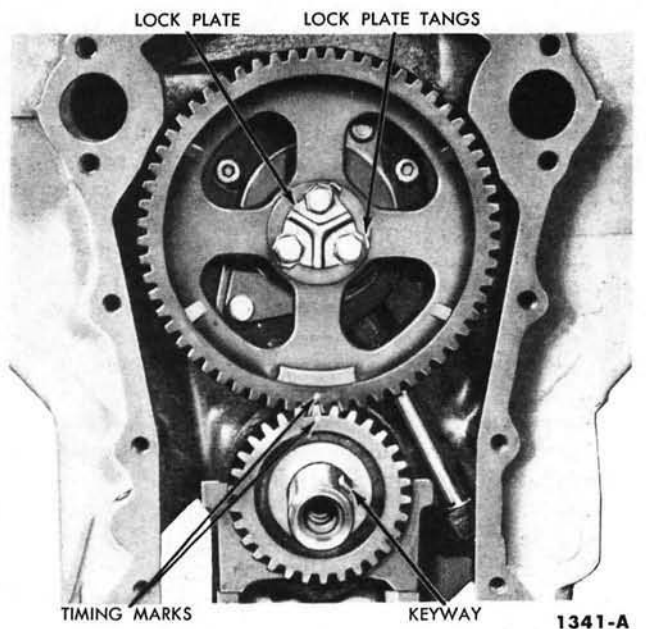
Timing Gear Alignment—302 or 332 Engine
